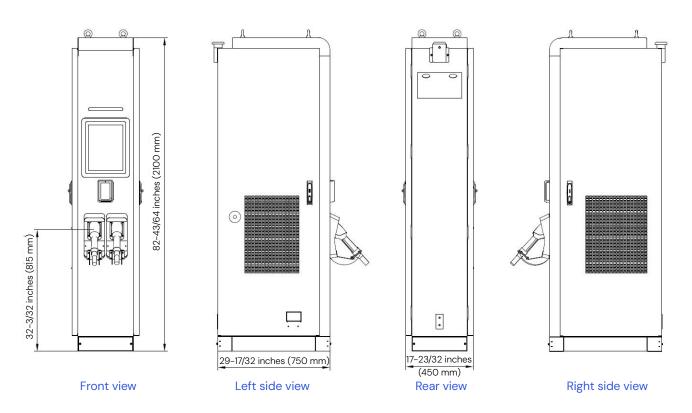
A Views and dimensions of SEC Series User Terminal
